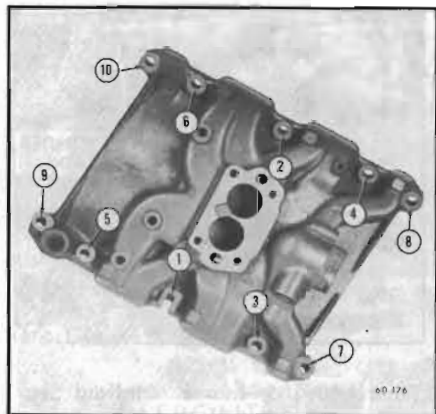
Intake Manifold Bolt Tightening Sequence
